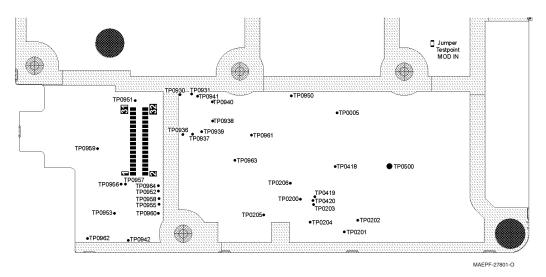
Main Board Test Points—Bottom Side (for Mid Power)
